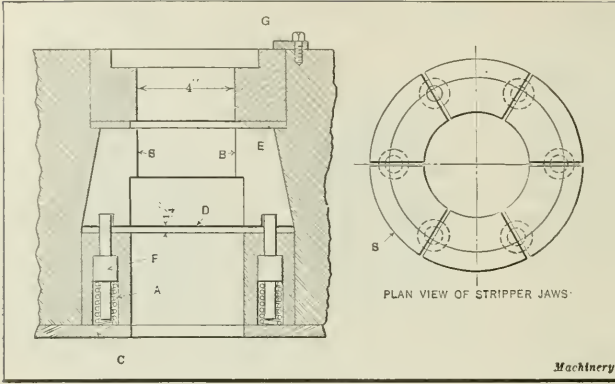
Push-through Die fitted with Stripper adapted for Long Thin-shelled Work
